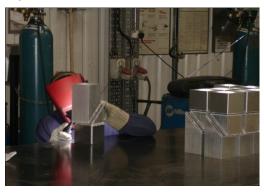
The welding process, which usually requires a skilled operator
